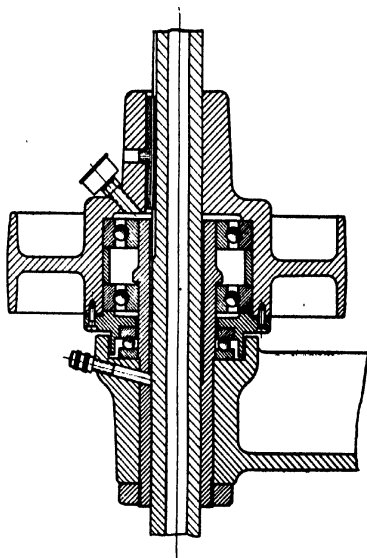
Belt pulley running on ball bearings. Arranged to relieve spindle from pull of belt.
